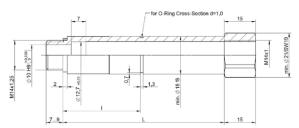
Installation with mounting sleeve Type 6586AQ..
